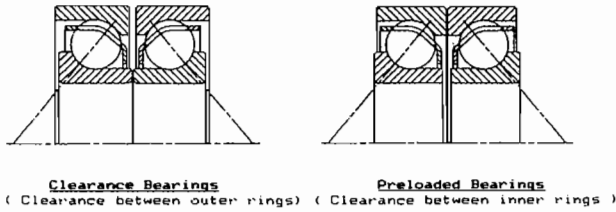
Angular Contact Ball Bearings with Clearance and Preload.
